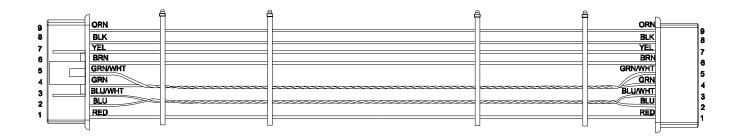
VLX3 AUX COMM Interface Cable Assembly
